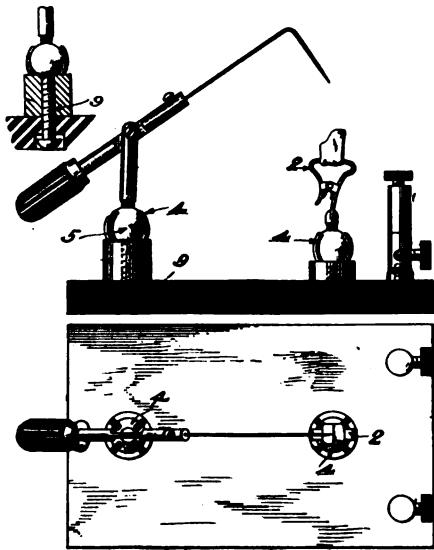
Showing construction and assembly of the cat-whisker detector stand
